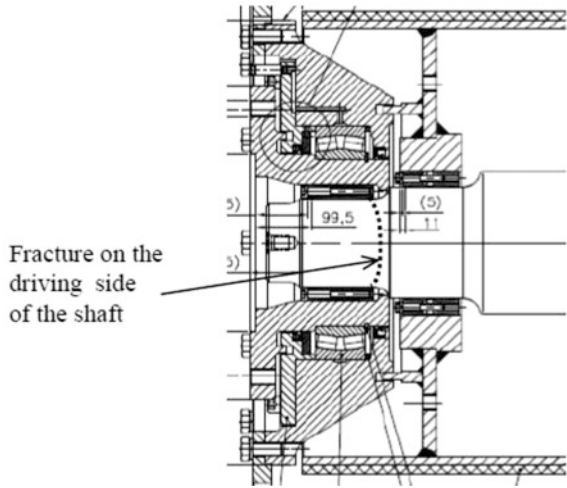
Location of the shaft fracture on the TOLLOK locking assembly edge and description
